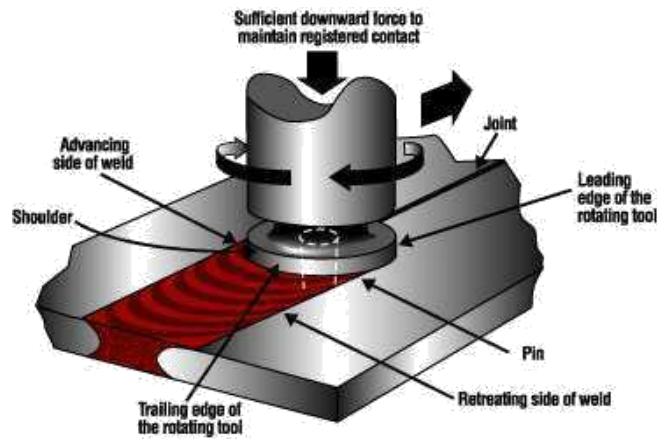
Mechanism of Friction Stir Welding
